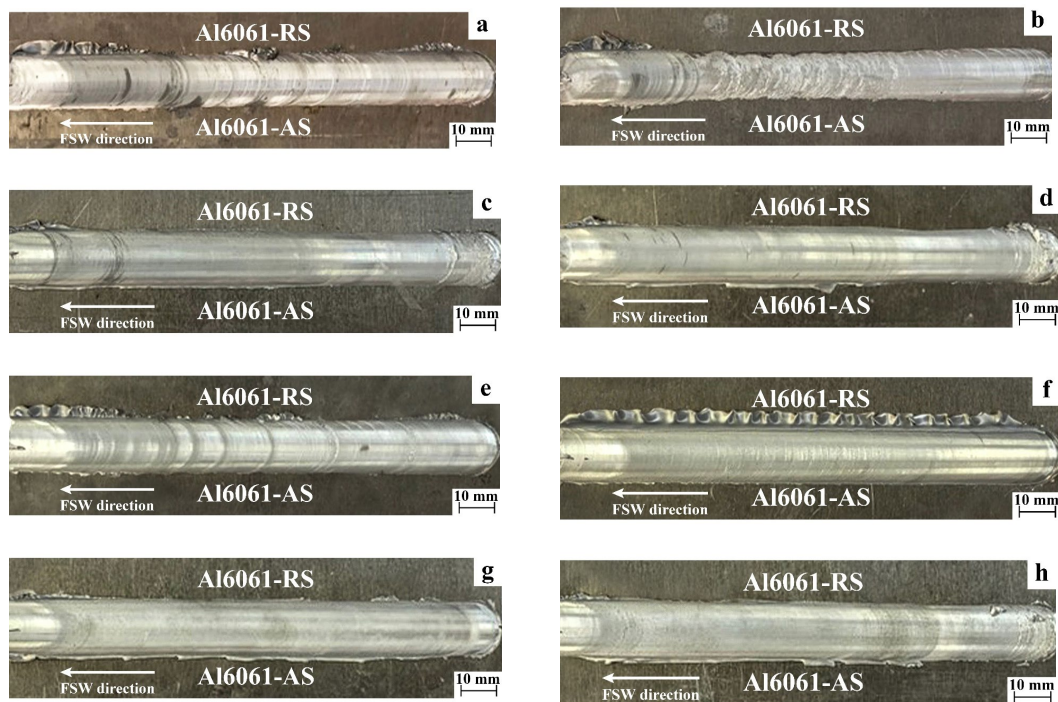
The surface images of the welding specimens. (a) Specimen 1, (b) Specimen 2, (c) Specimen 3, (d) Specimen 4, (e) Specimen 5, (f) Specimen 6, (g) Specimen 7, (h) Specimen 8.
